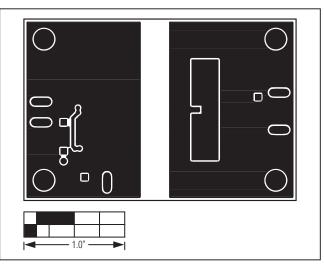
MAX13256 EV Kit PCB Layout—Solder Side
